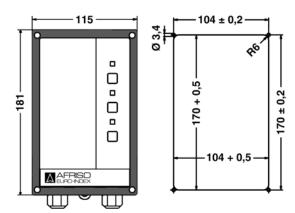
Transducer with mounting frame for panel mounting; right: panel cut out
